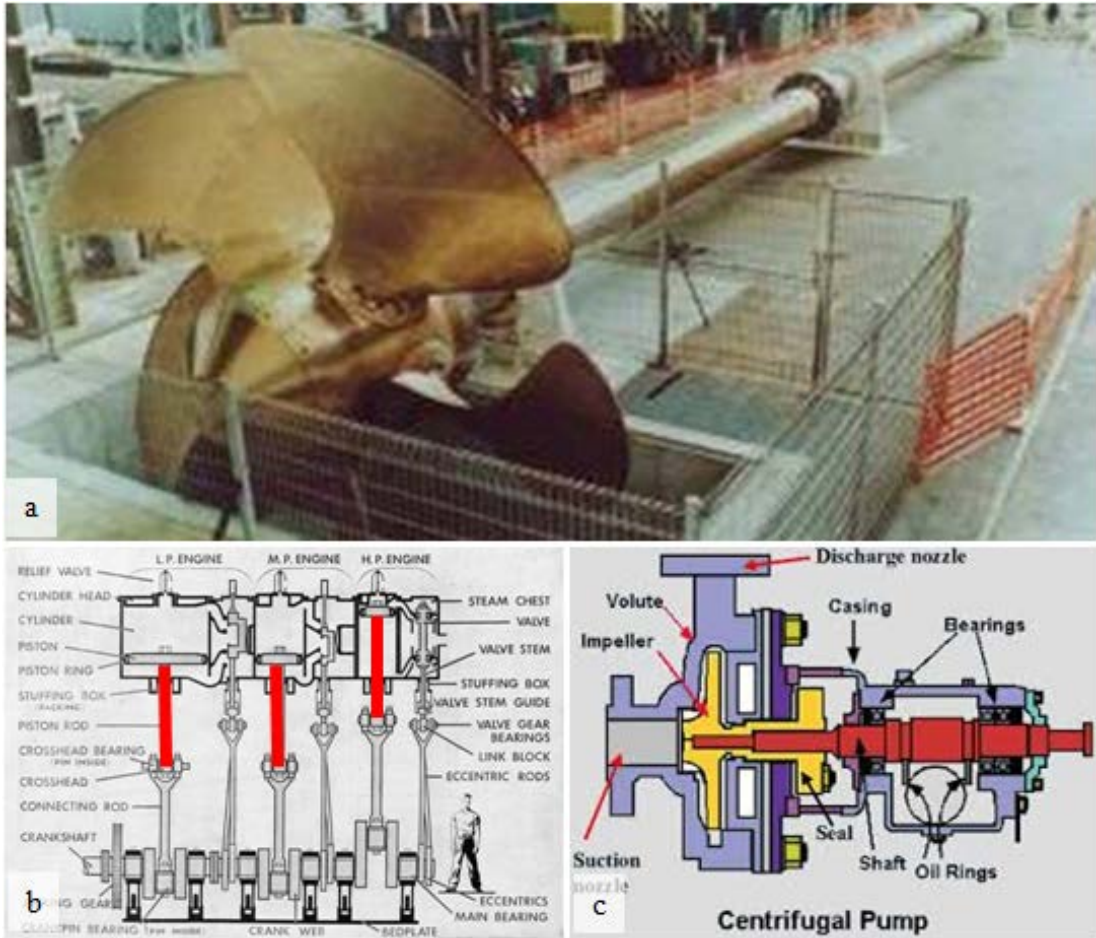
Maritime components made of Monel K500: (a) submarine propeller shaft [26], (b) diesel engine piston rod [27] and (c) centrifugal pump shaft [28].
